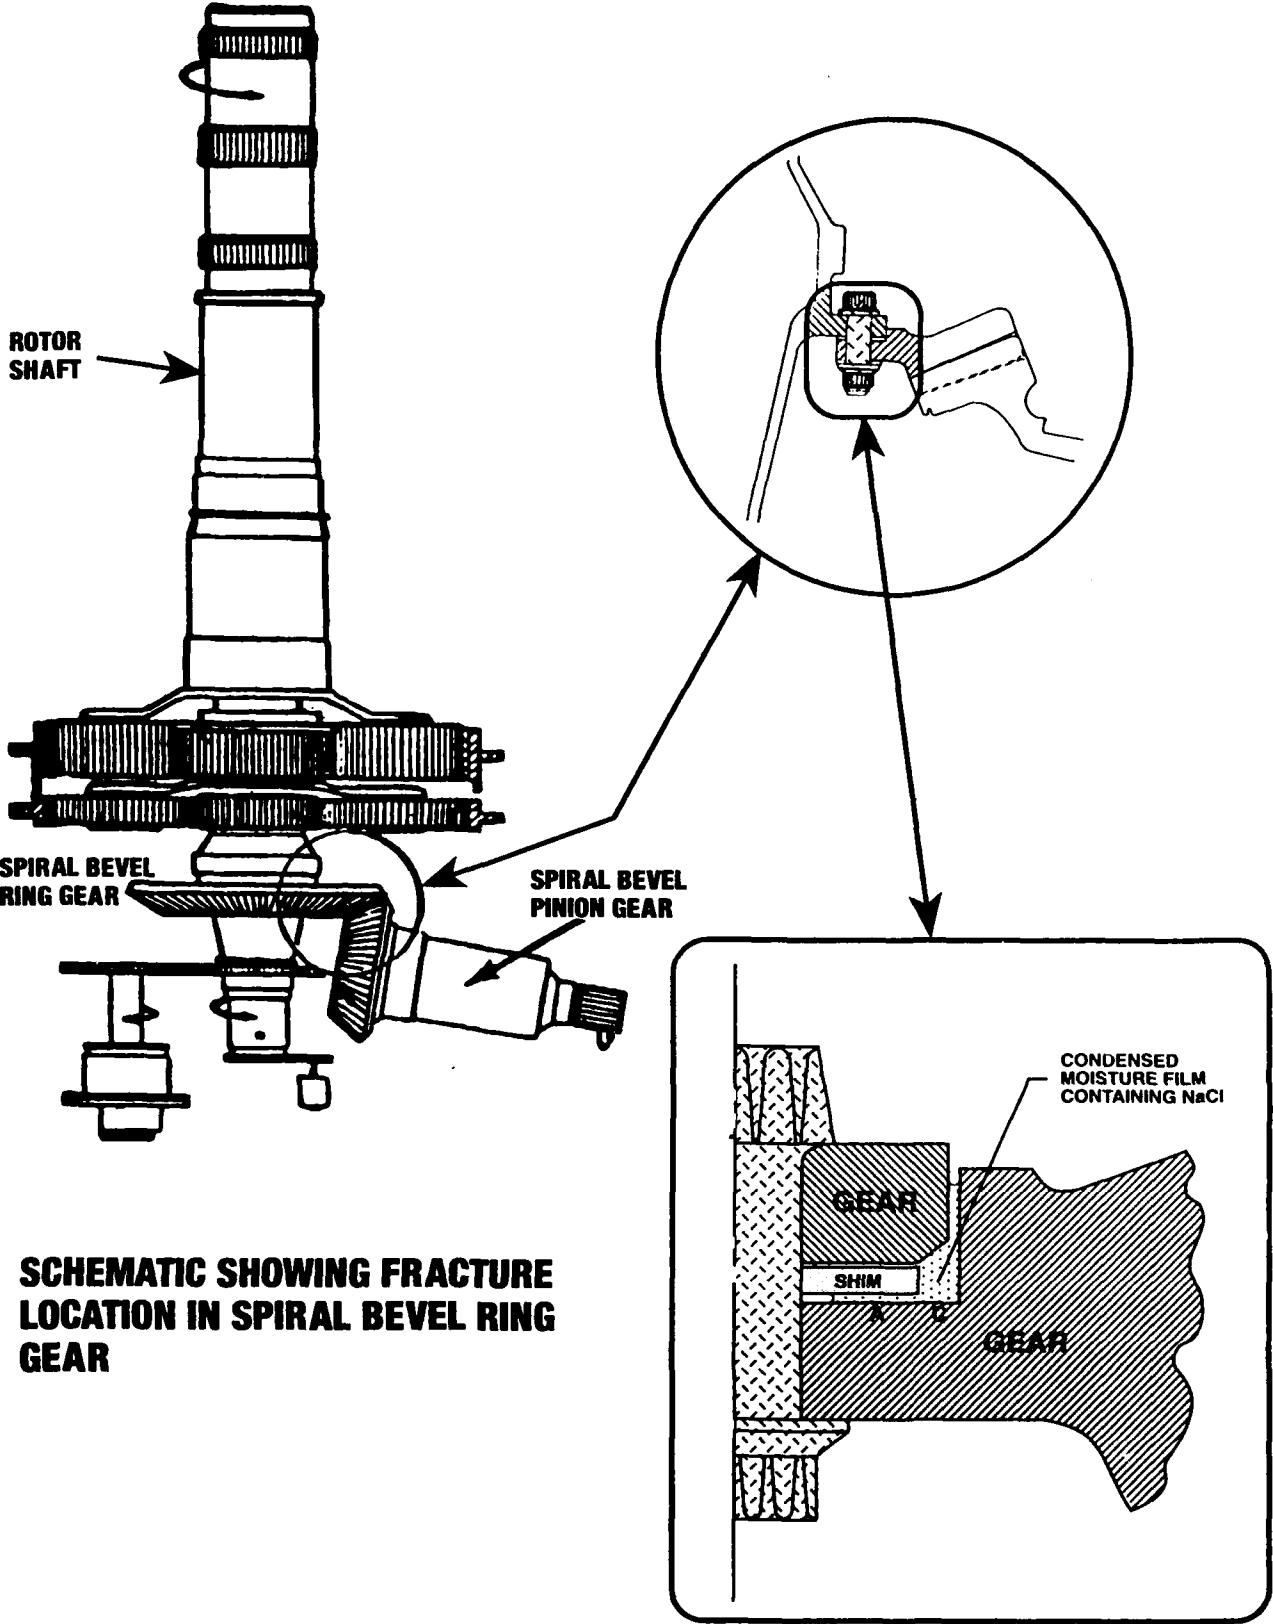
Failure location of steel spiral bevel ring gear form a helicopter transmission.
